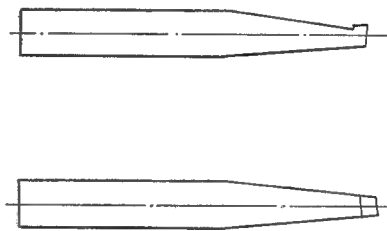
Elevation and plan of boring tool. Note the taper ground on neck, ensuring maximum rigidity
